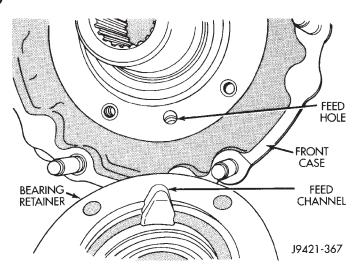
Aligning Retainer Oil Channel With Feed Hole In Front Case
